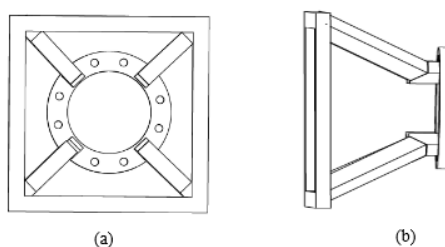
CAD drawing of the square support frame: Front view, (a); side view, (b)
